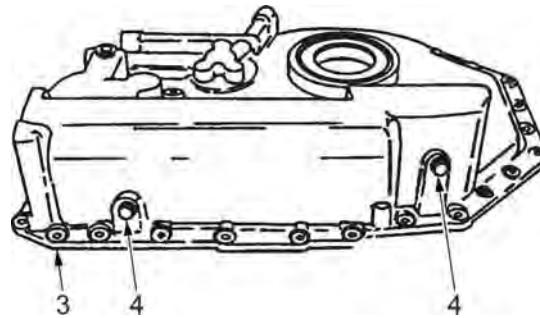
Pipe Plugs, Left Cover Assembly, Installation, View 2.
